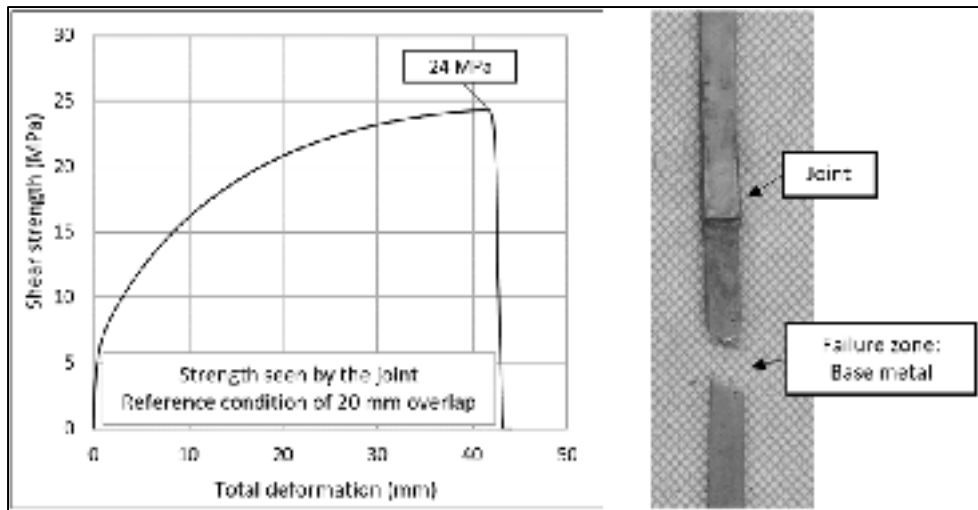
Tensile testing of 20 mm reference brazed joints, (a) tensile test profile, and (b) typical image of the failure zone
